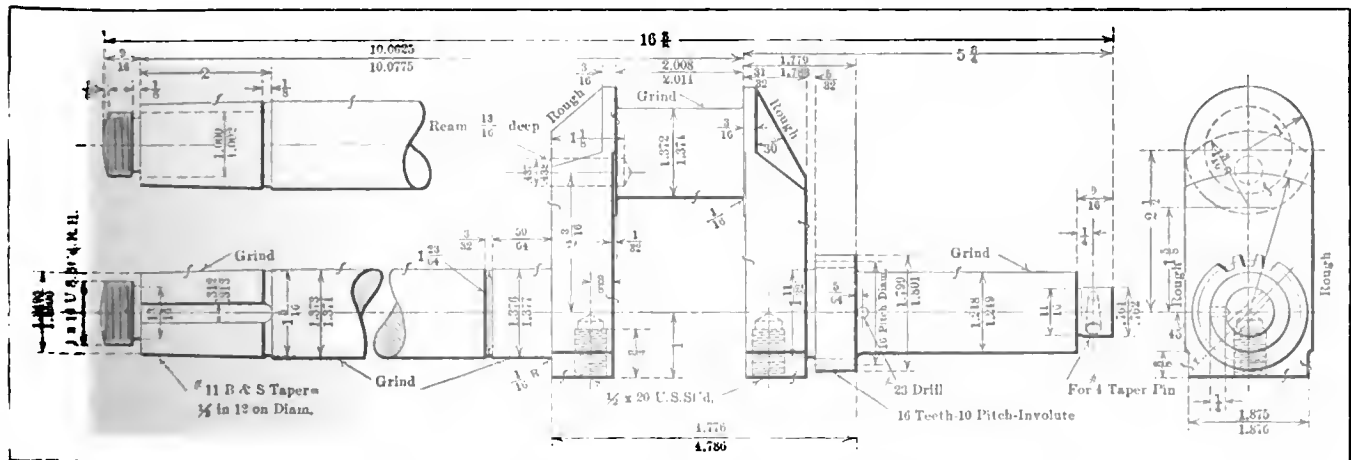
Crankshaft of 40-point carbon open hearth steel, with liberal bearings surfaces, stout arms and means of direct and auxiliary balancing by thorough use of an auxiliary balance gear
